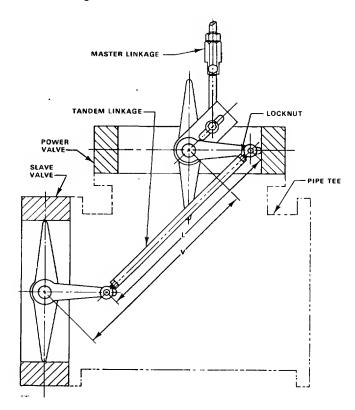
Tandem Linkage Adjustment for Three-Way Valve Assemblies
